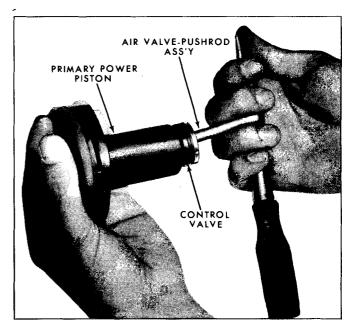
C-13 Removing Air Valve-Pushrod Assembly
